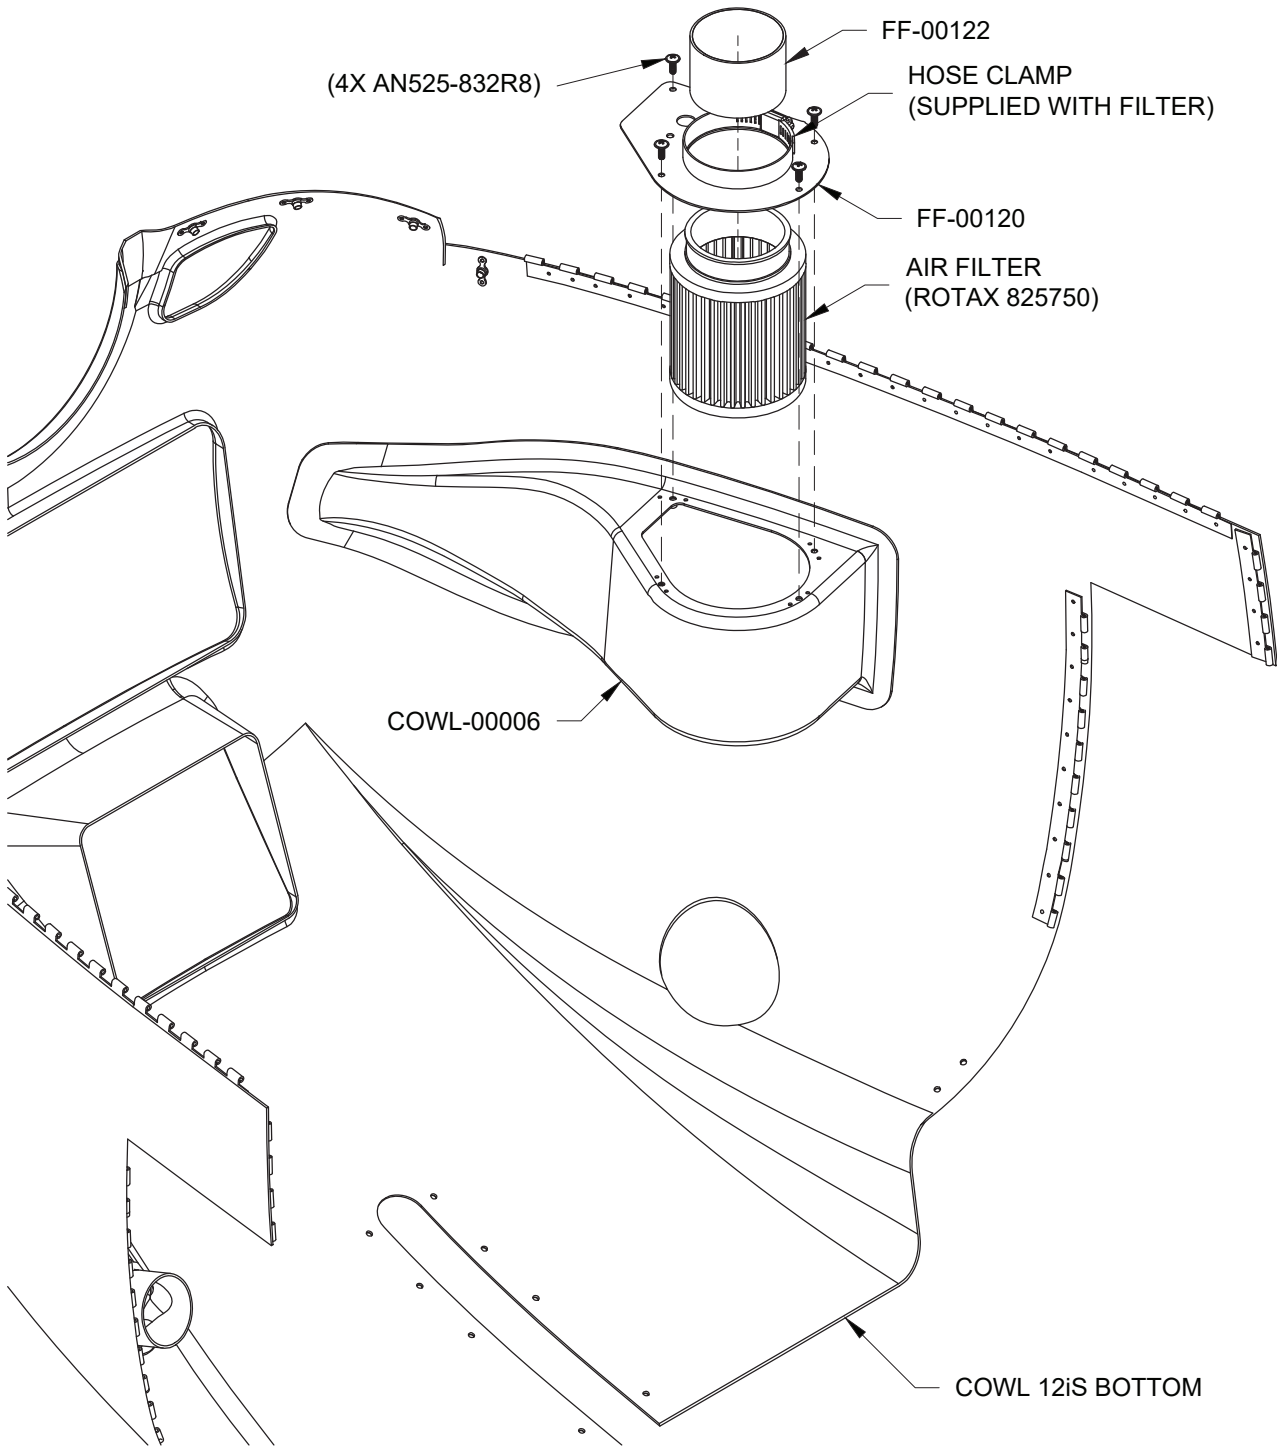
AIR INDUCTION FILTER ASSEMBLY
